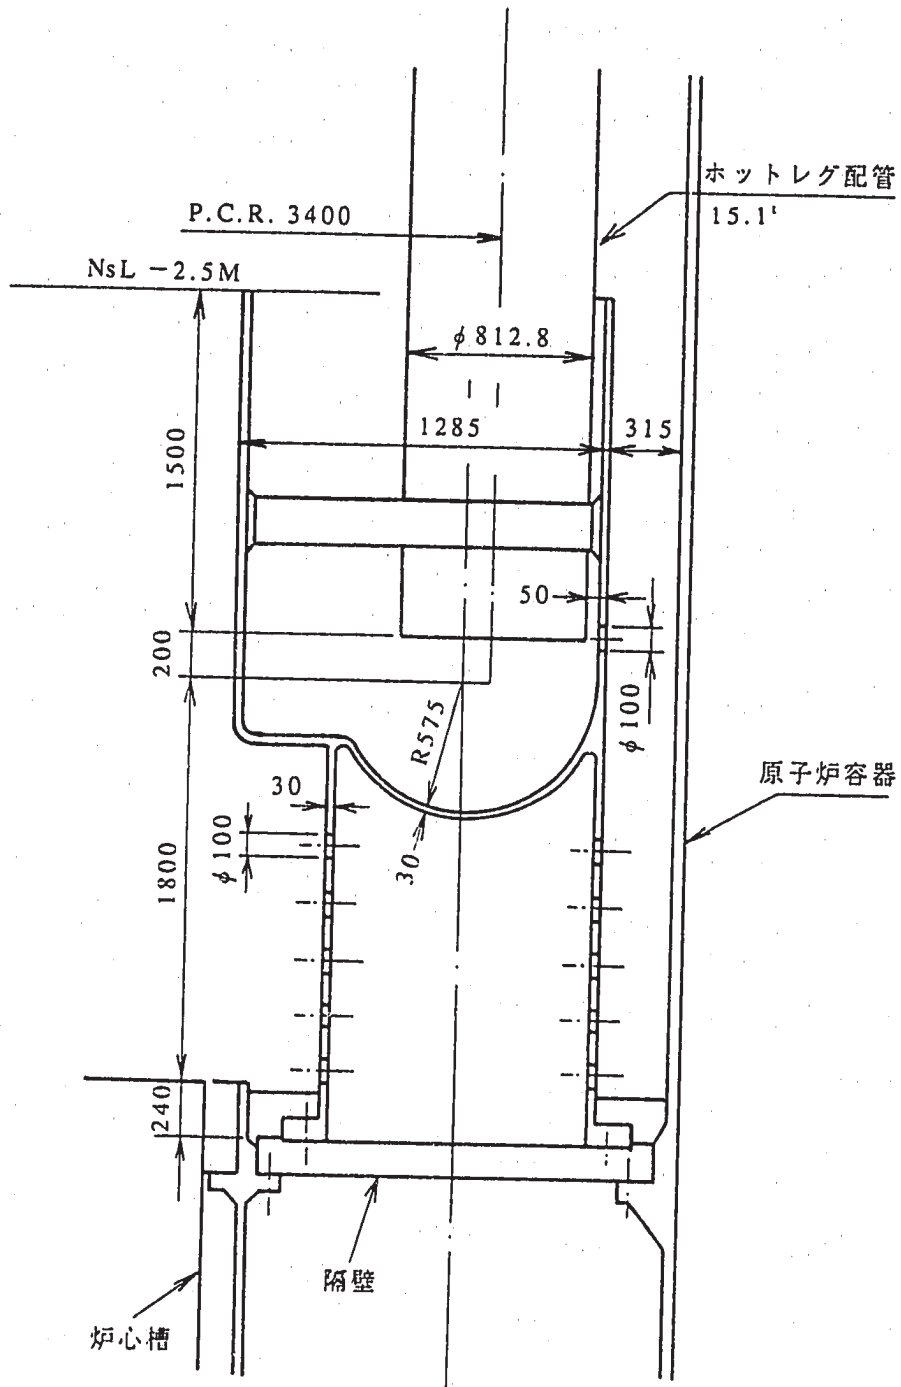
Cross-Sectional View of Outer Barrel of Outlet Nozzle
